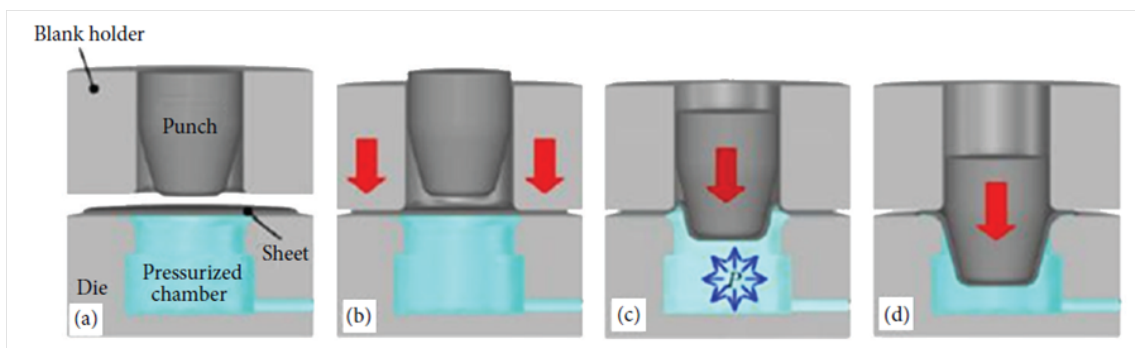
Sheet hydroforming: (a) blank setting (b) blank holding; (c) drawing and (d) finishing [15]
